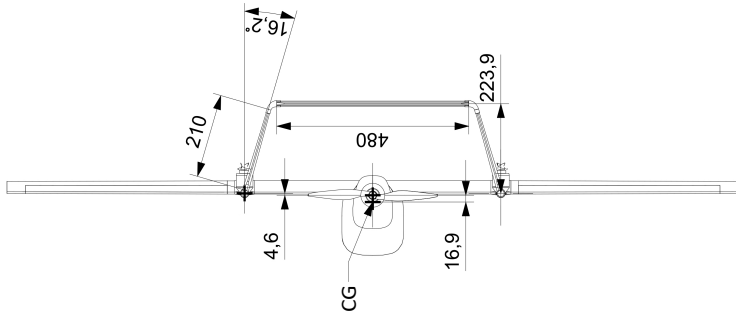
Technical drawing of the hybrid Scihunter UAS, rear view [Frö+19]
